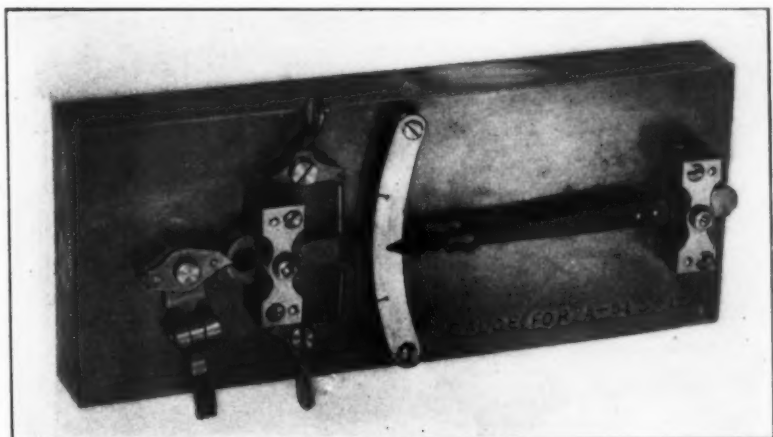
TEST GAGE FOR A 51 AND 51 A
